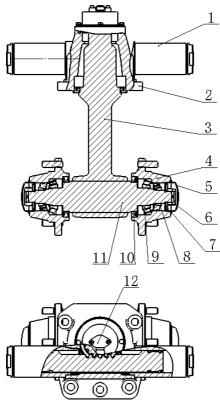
steering axle 1) steering cylinder 2) pivoting support 3) support gear shaft 4) hub 5) hub cover 6) lock nut 7) washer 8) bearing 9)bearing 10)oil seal 11)axle 12) Angle potentiometer
